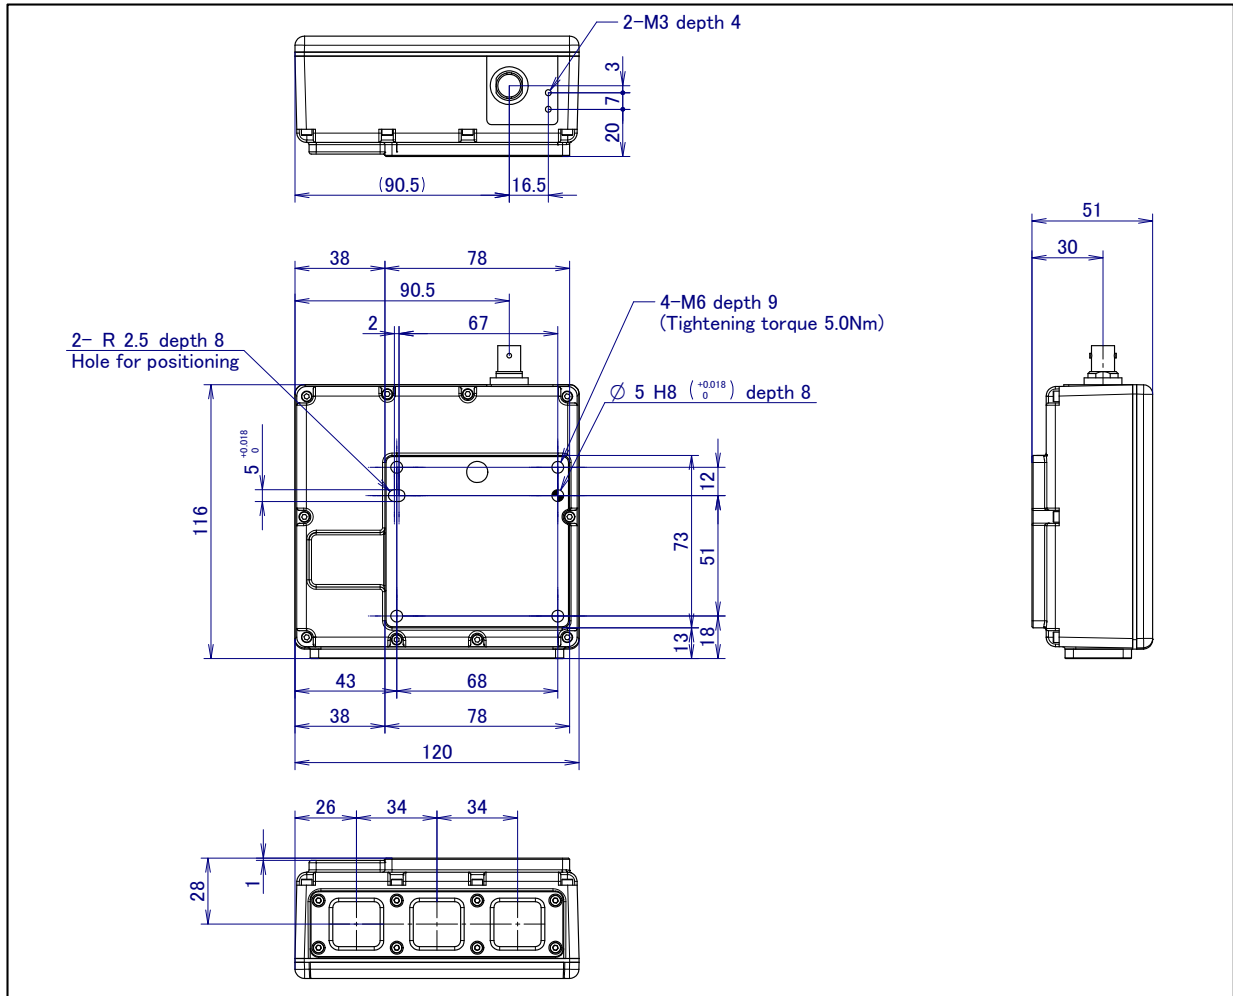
(b) External dimensions of the 3D Vision Sensor (3DV/400 without LED)
